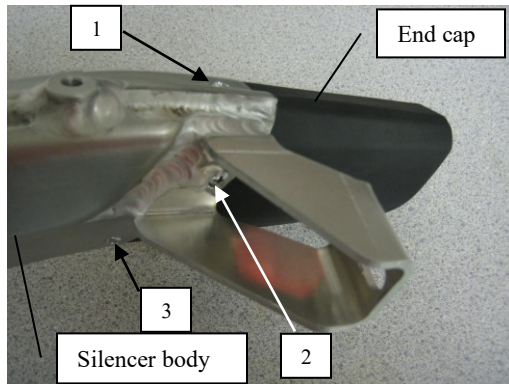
Silencer with arrows identifying the three screws that hold the end cap to the silencer body.
